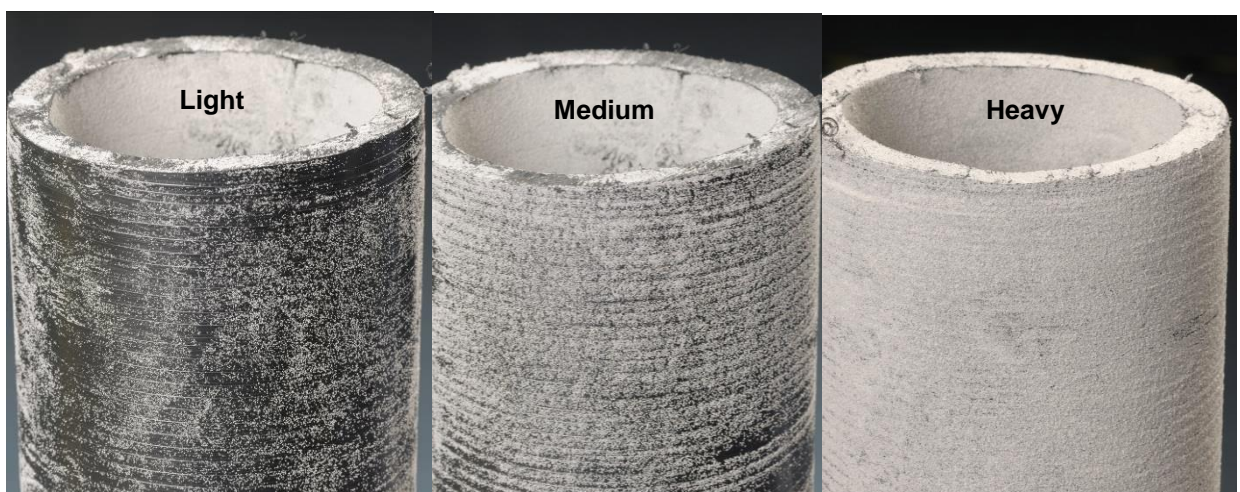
Standard sand-contaminated pipe samples for EF welding.
